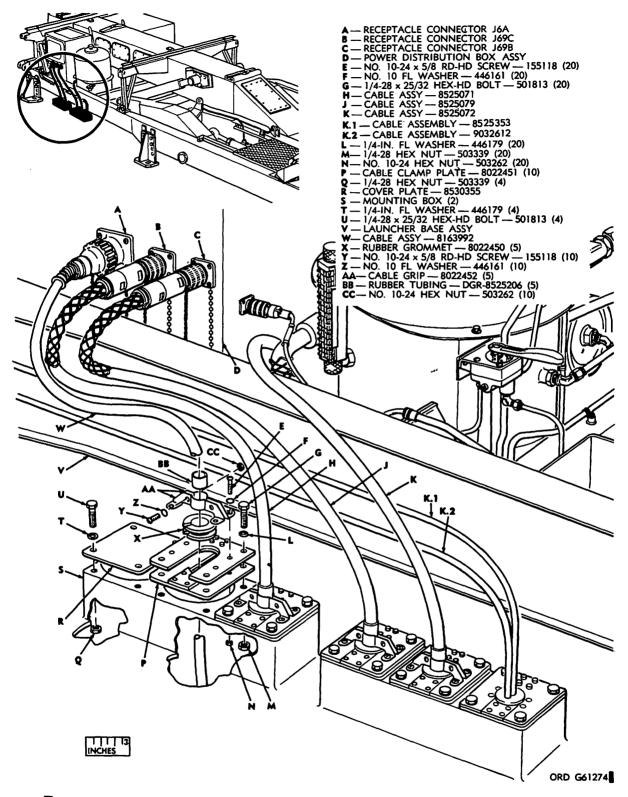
Removal and installation of the cable assemblies through the elevator platform.
